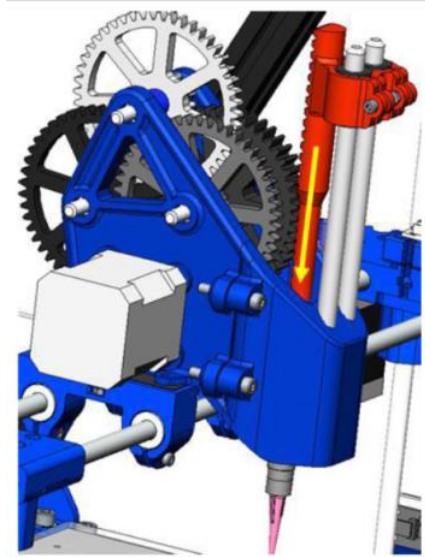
General view of the Syringe extrusion system of the 3D printer [52].
